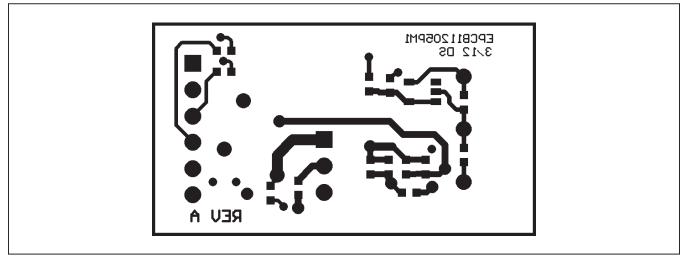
MAX11205PMB1 Peripheral Module PCB Layout—Solder Side
